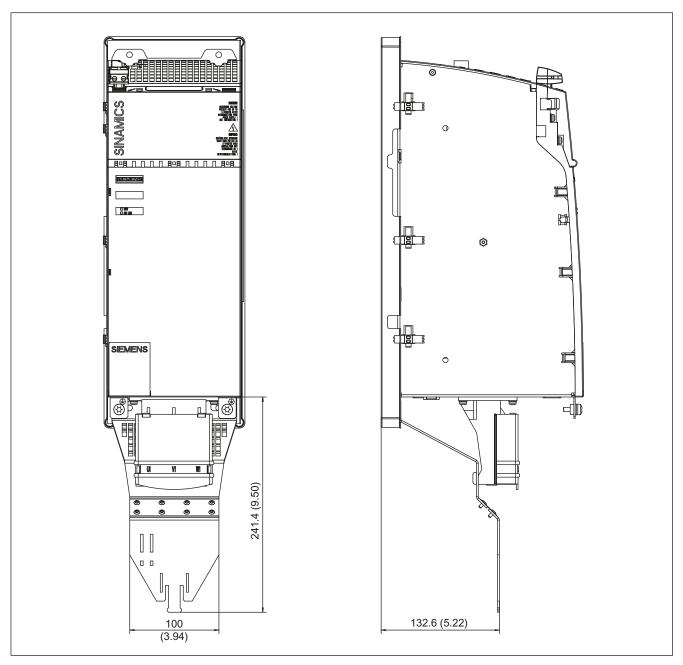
Dimension drawing of shield connecting plate on a 150 mm component with cold plate, all dimensions in mm and (inches)
